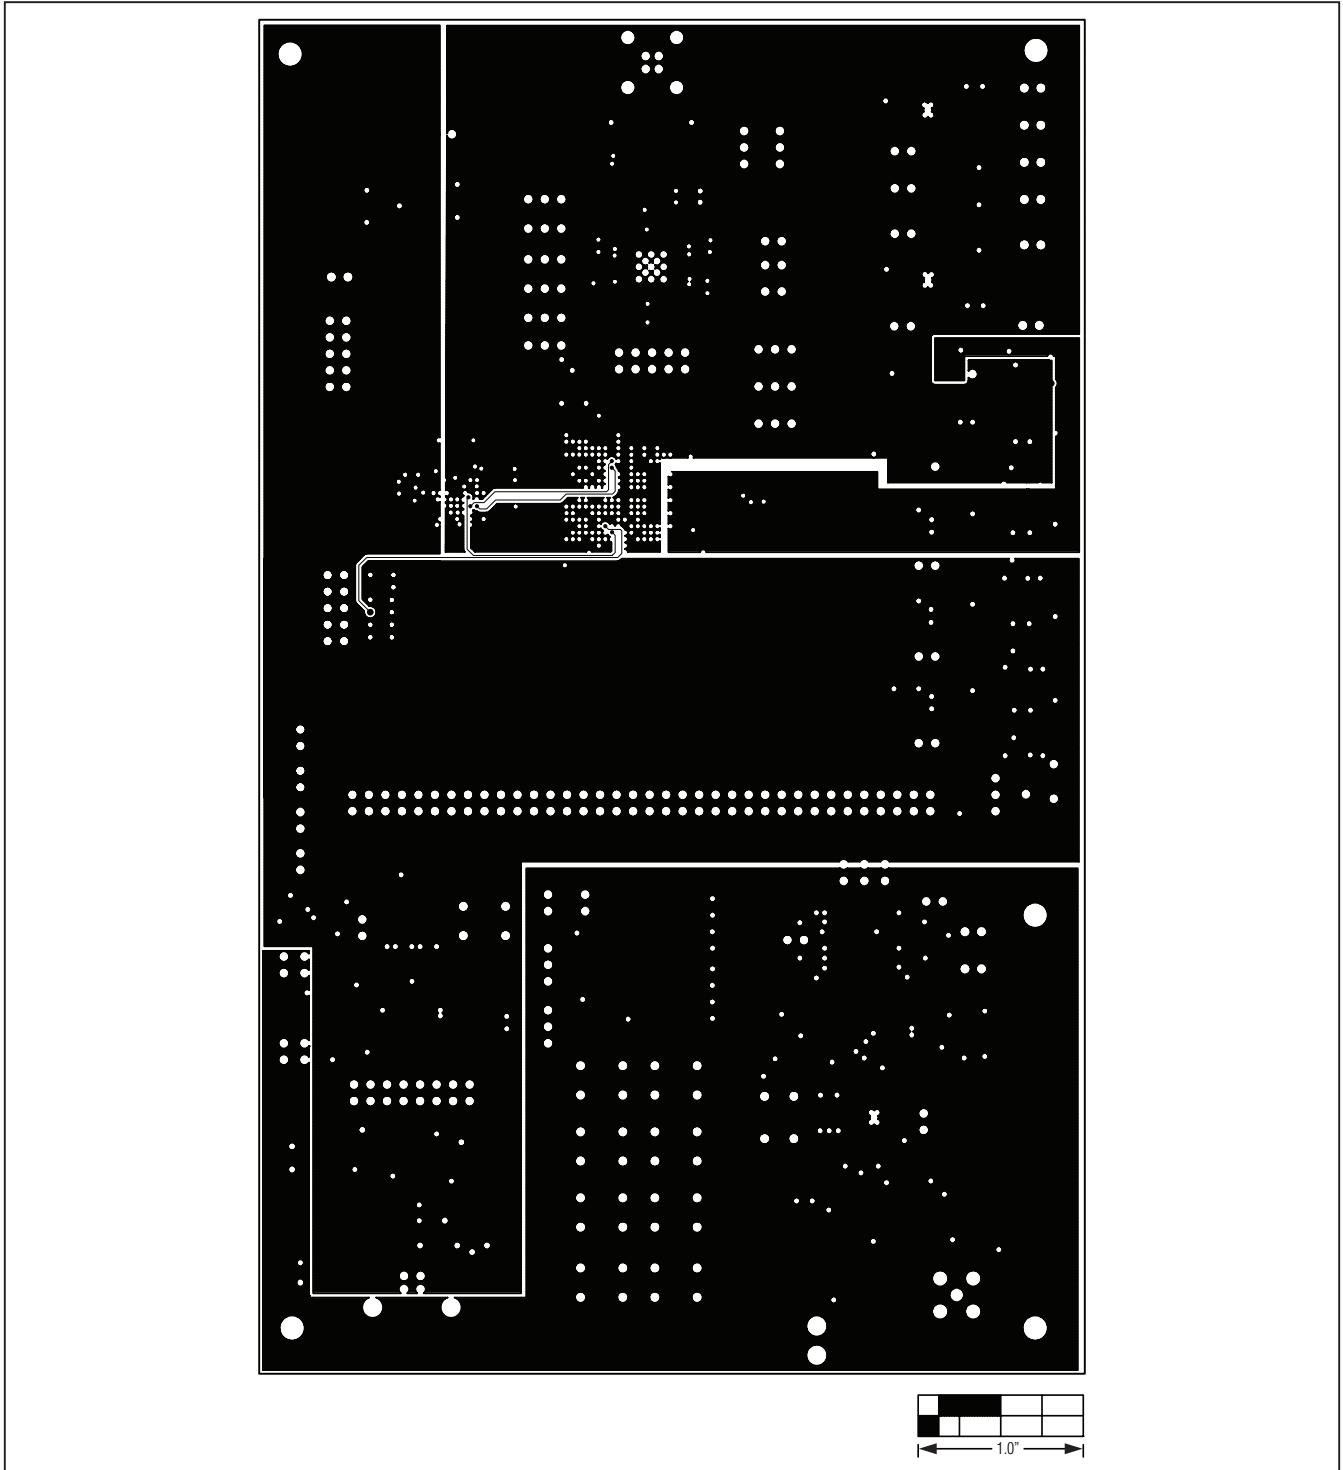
MAX9249 EV Kit PCB Layout—Power Layer 6
